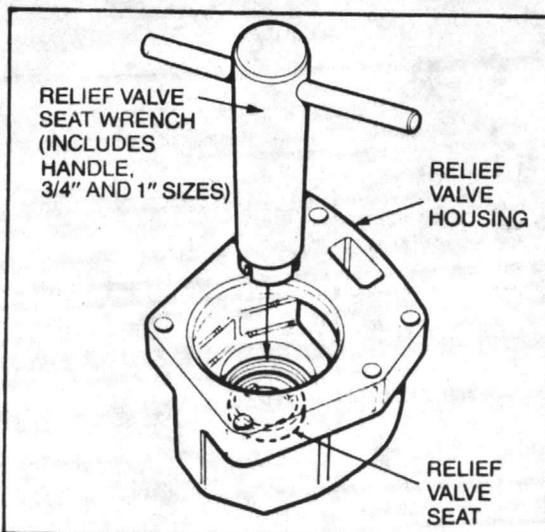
A. RELIEF VALVE SEAT REPLACEMENT FRP-I
